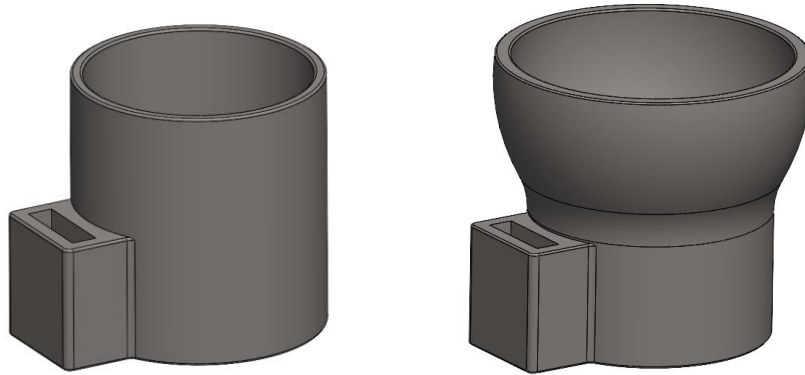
Simple Cup Holder Design (left) and Complex Cup Holder Design (right)
